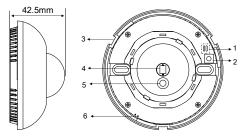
Dimensions-Side View Figure 5. Components - Interior View
